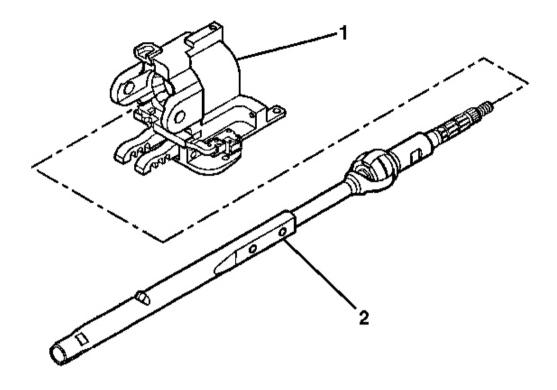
Steering Shaft Assembly & Steering Column Tilt Head Housing Assembly Courtesy of GENERAL MOTORS CORP.
